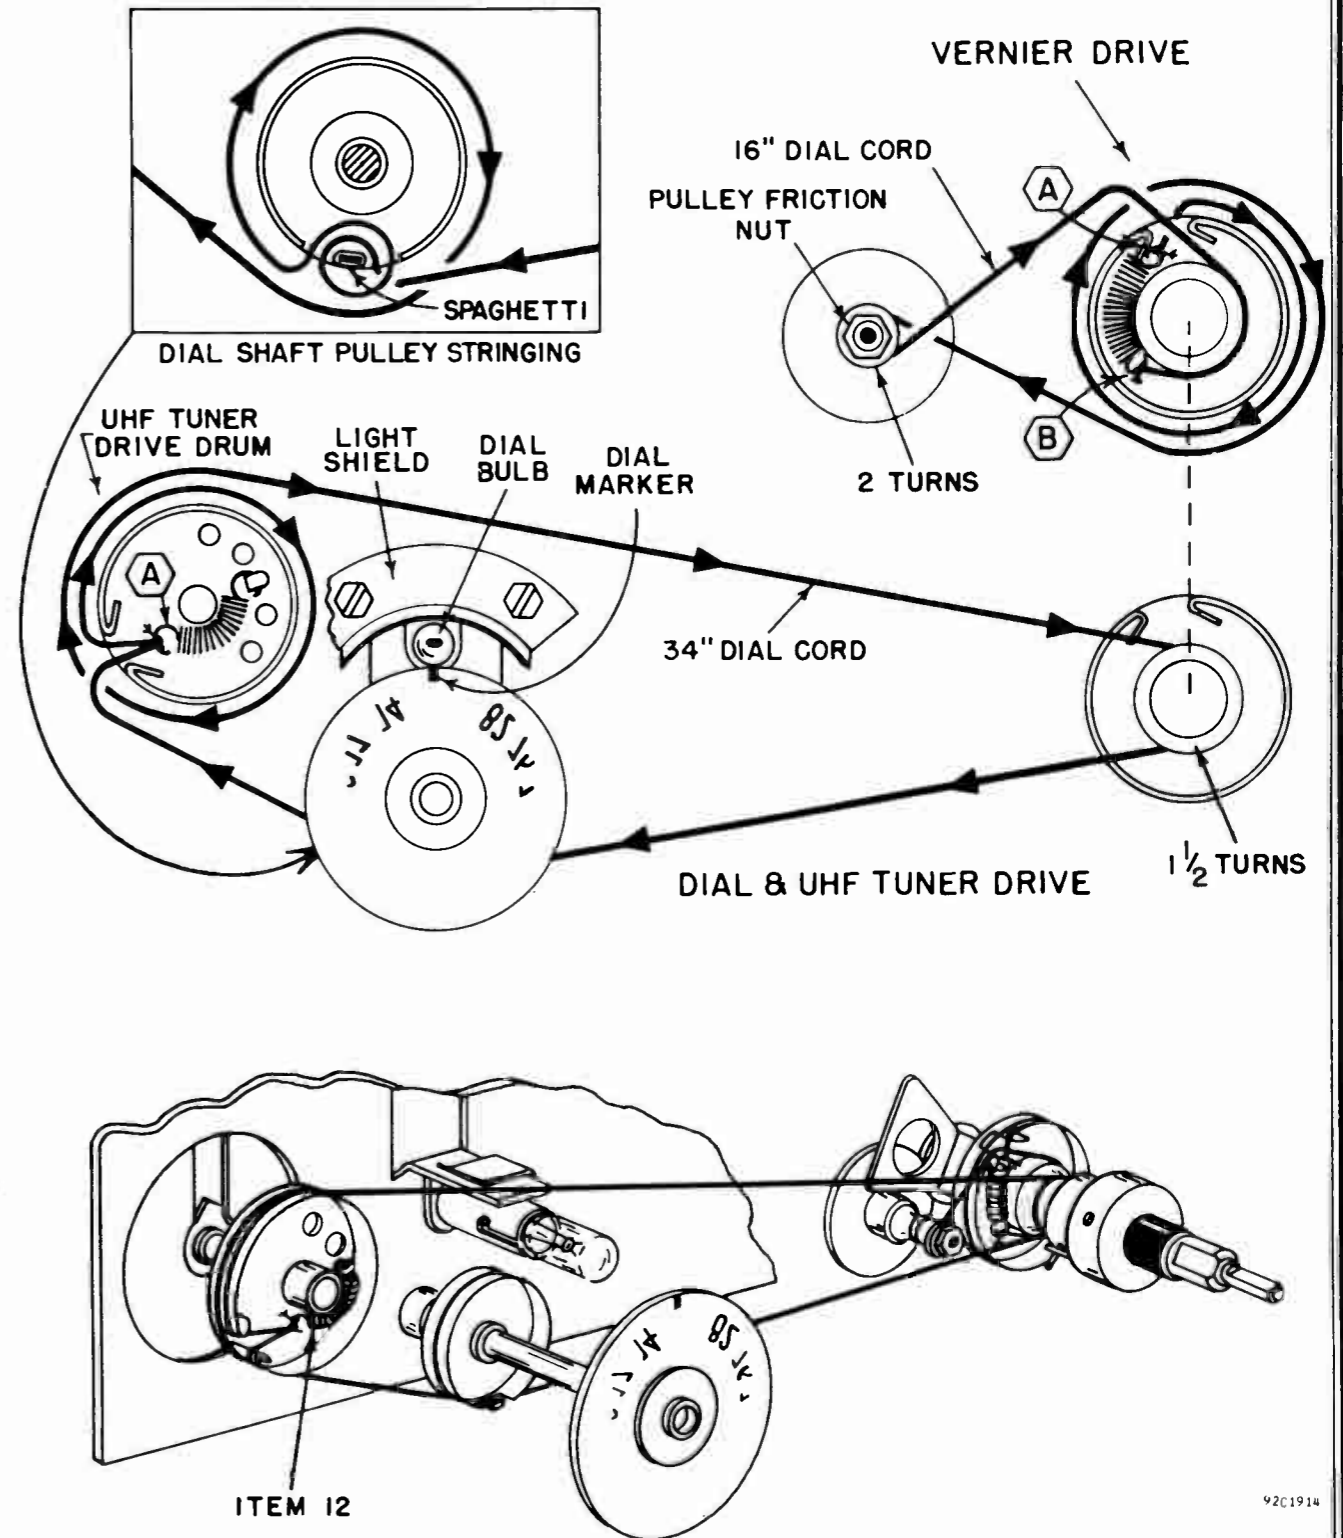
A. 1E1484 UHF Tuner Drive Mechanism Stringing
